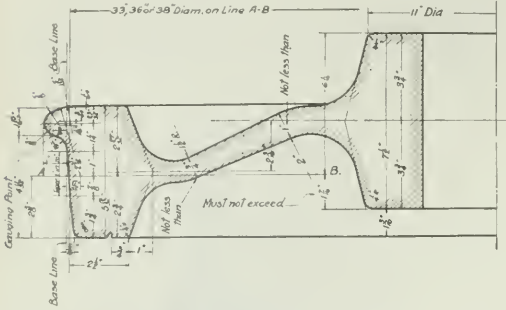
in., 36 in. or 38 in. Solid Steel Wheels for 6 in. x 11 in. Axles.
